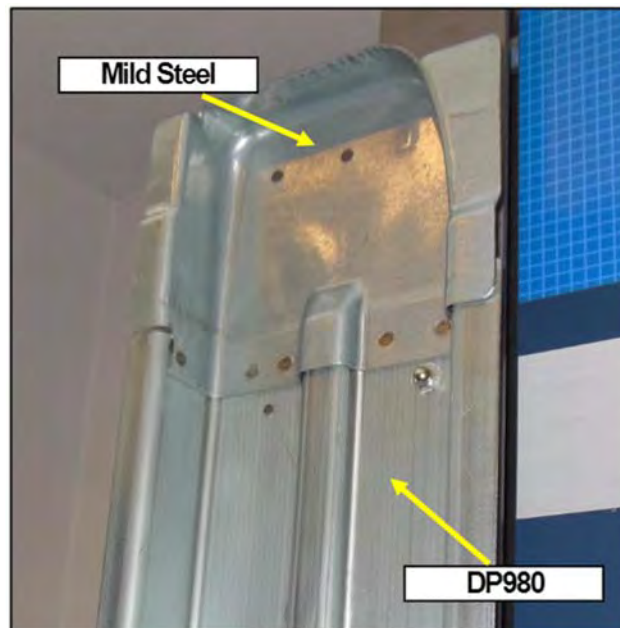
C-3: DP980 rail stamped open ended. A second mild steel part is stamped separately and spot welded to the end of the AHSS rail.
